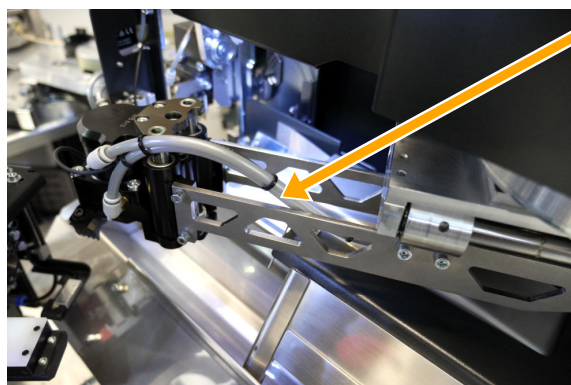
CrimpCenter 36 SP - Swivel Side 2
